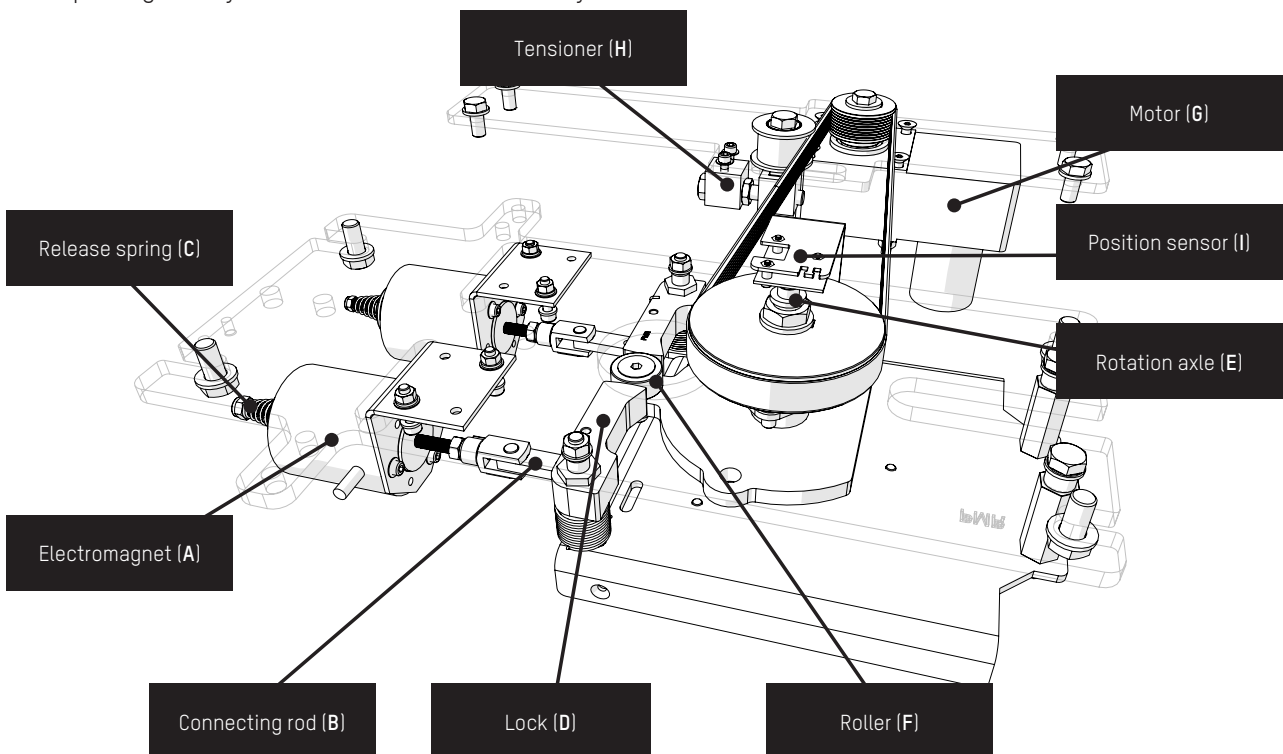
Mechanical assembly of the motorised TRS PMR door
